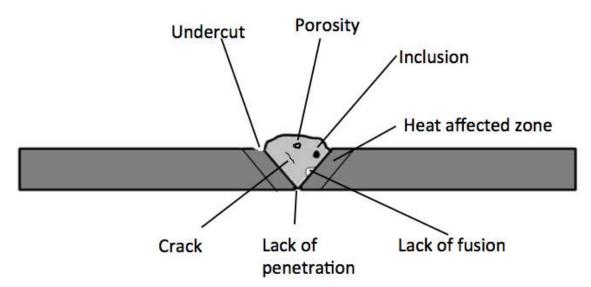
A generalized illustration of common defect types and their appearance in a weld cross section.
